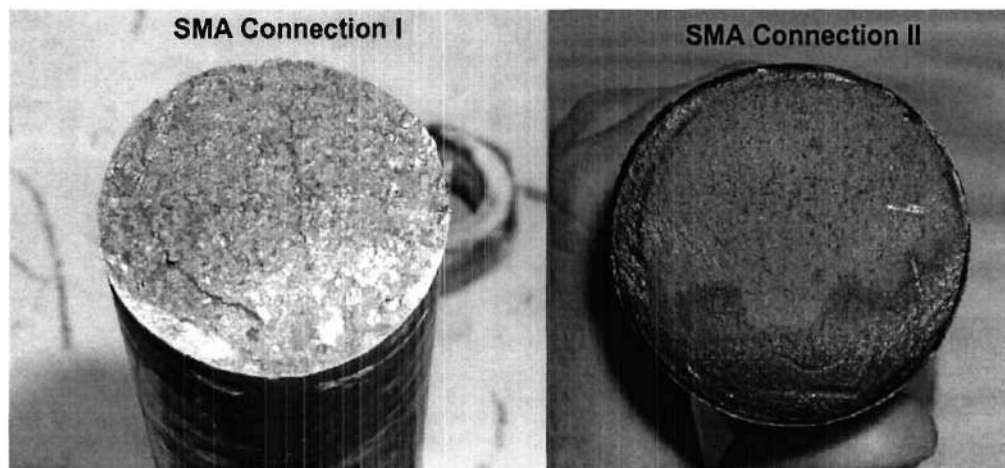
SMA Tendon Fracture Surfaces
